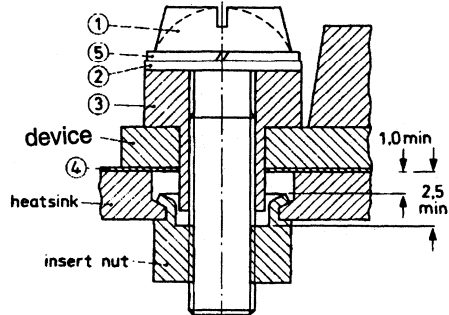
Assembly and heatsink requirements for 500V insulation. See also figures 9 and 10.
